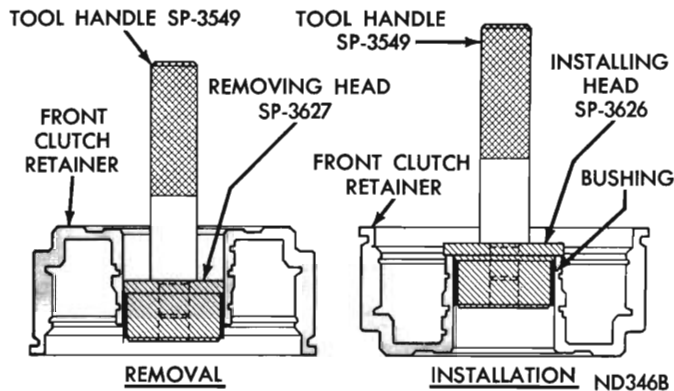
Replacing front clutch retainer bushing (A-904)
